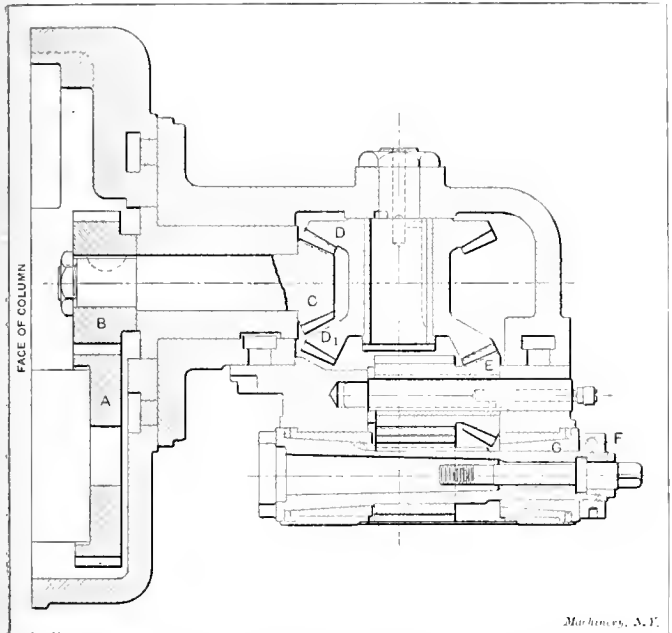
Section through Universal Milling Attachment made by the Kearney & Trecker Co., Milwaukee, Wis.
